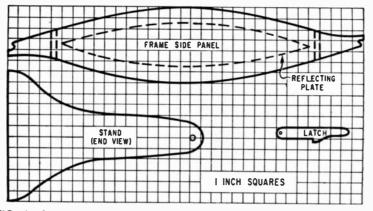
Cutting pattern. Stand is 3/4-in. plywood, body 1/2-in. plywood.
